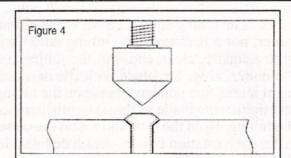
Remove adapter. End of tube should be bell shaped.
